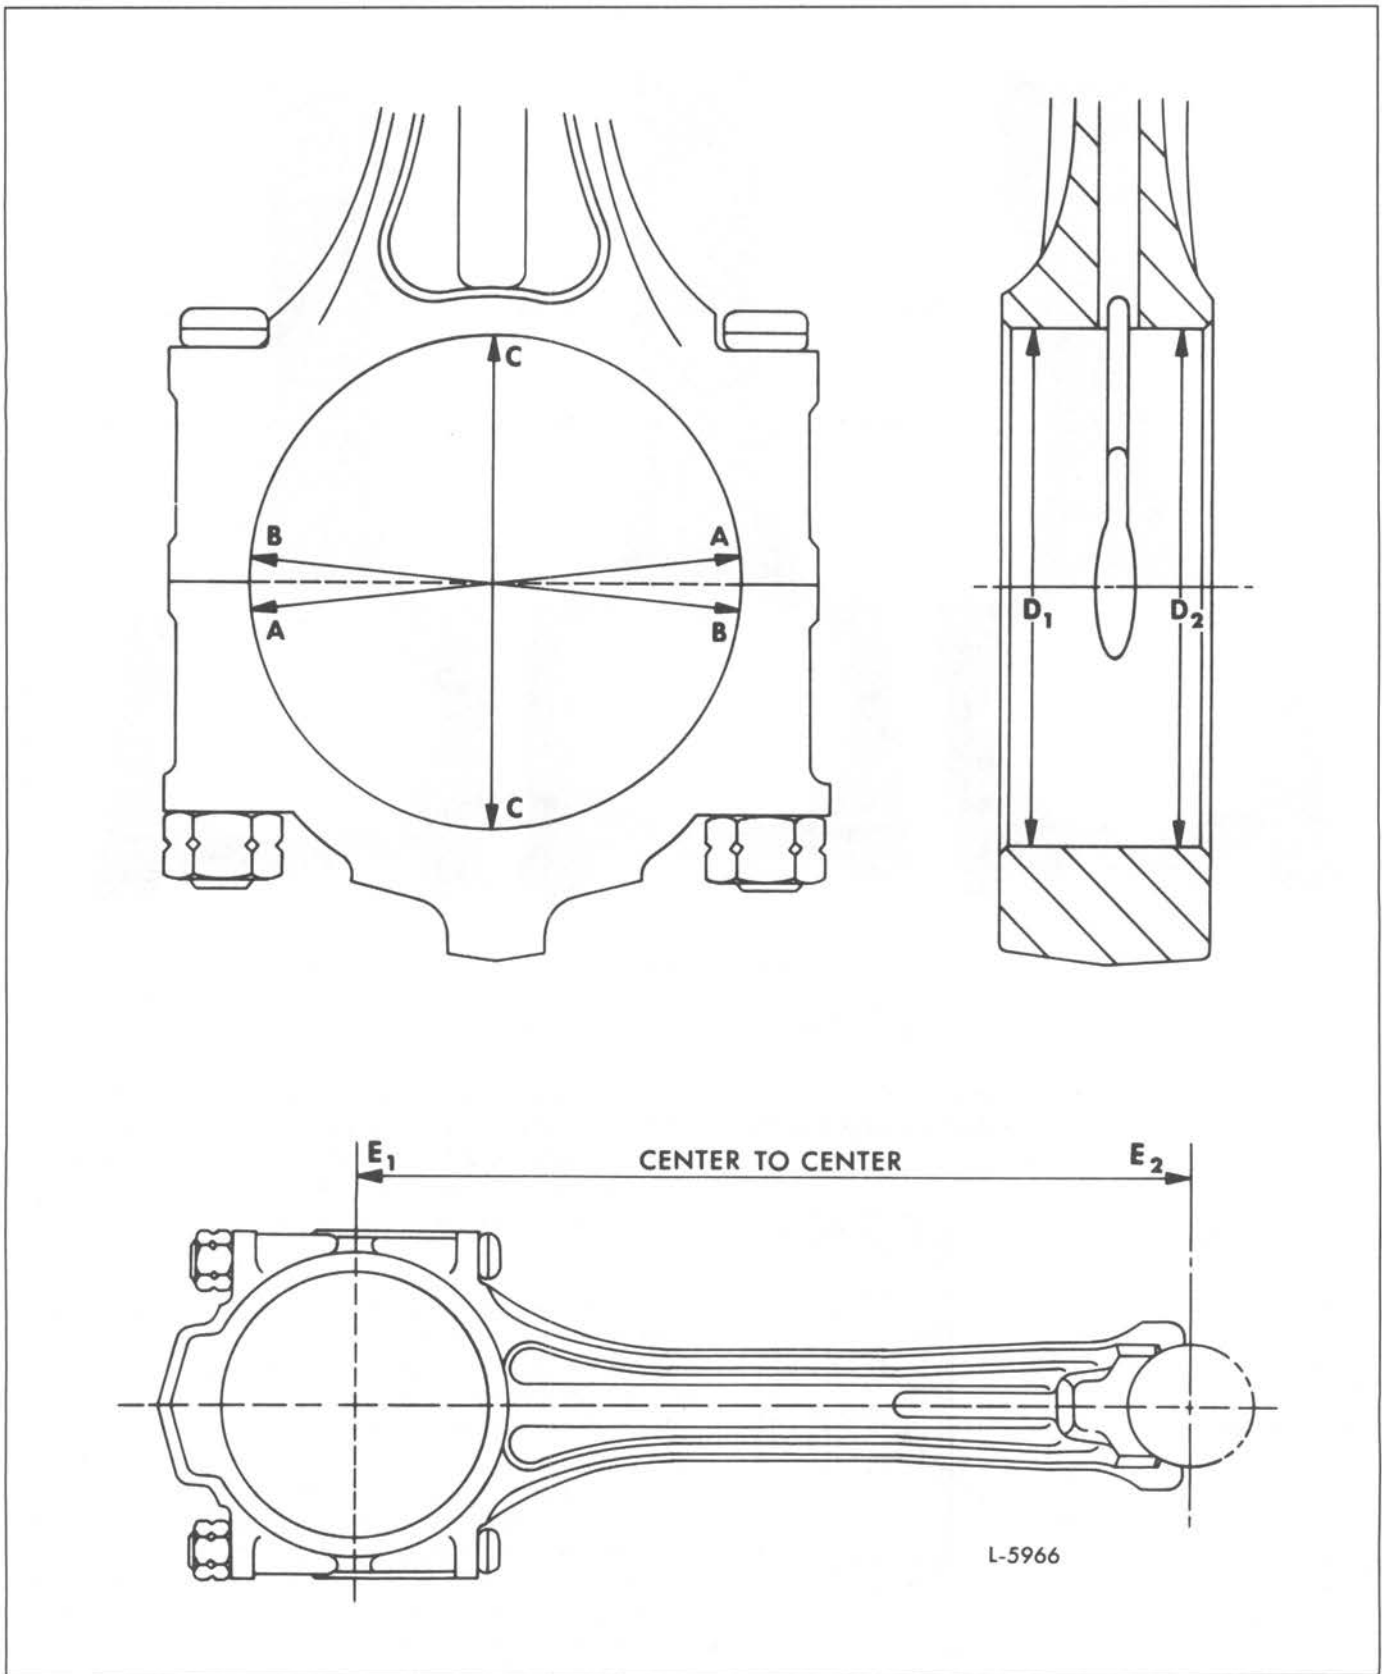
Dimensional Inspection of Cross-Head Piston Connecting Rods
